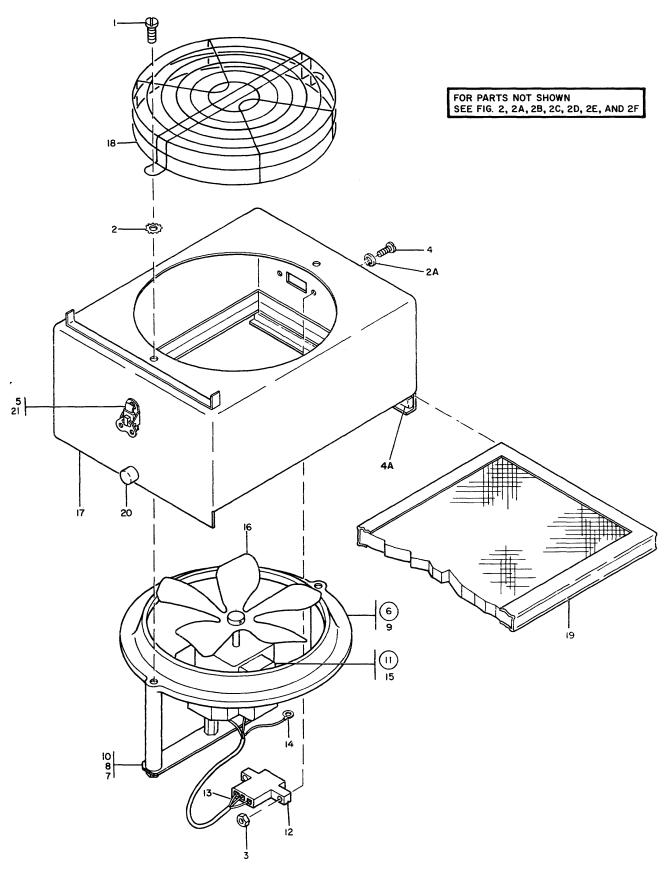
COOLING UNIT ASSEMBLY-60 CYCLE. SEE LIST 3.
